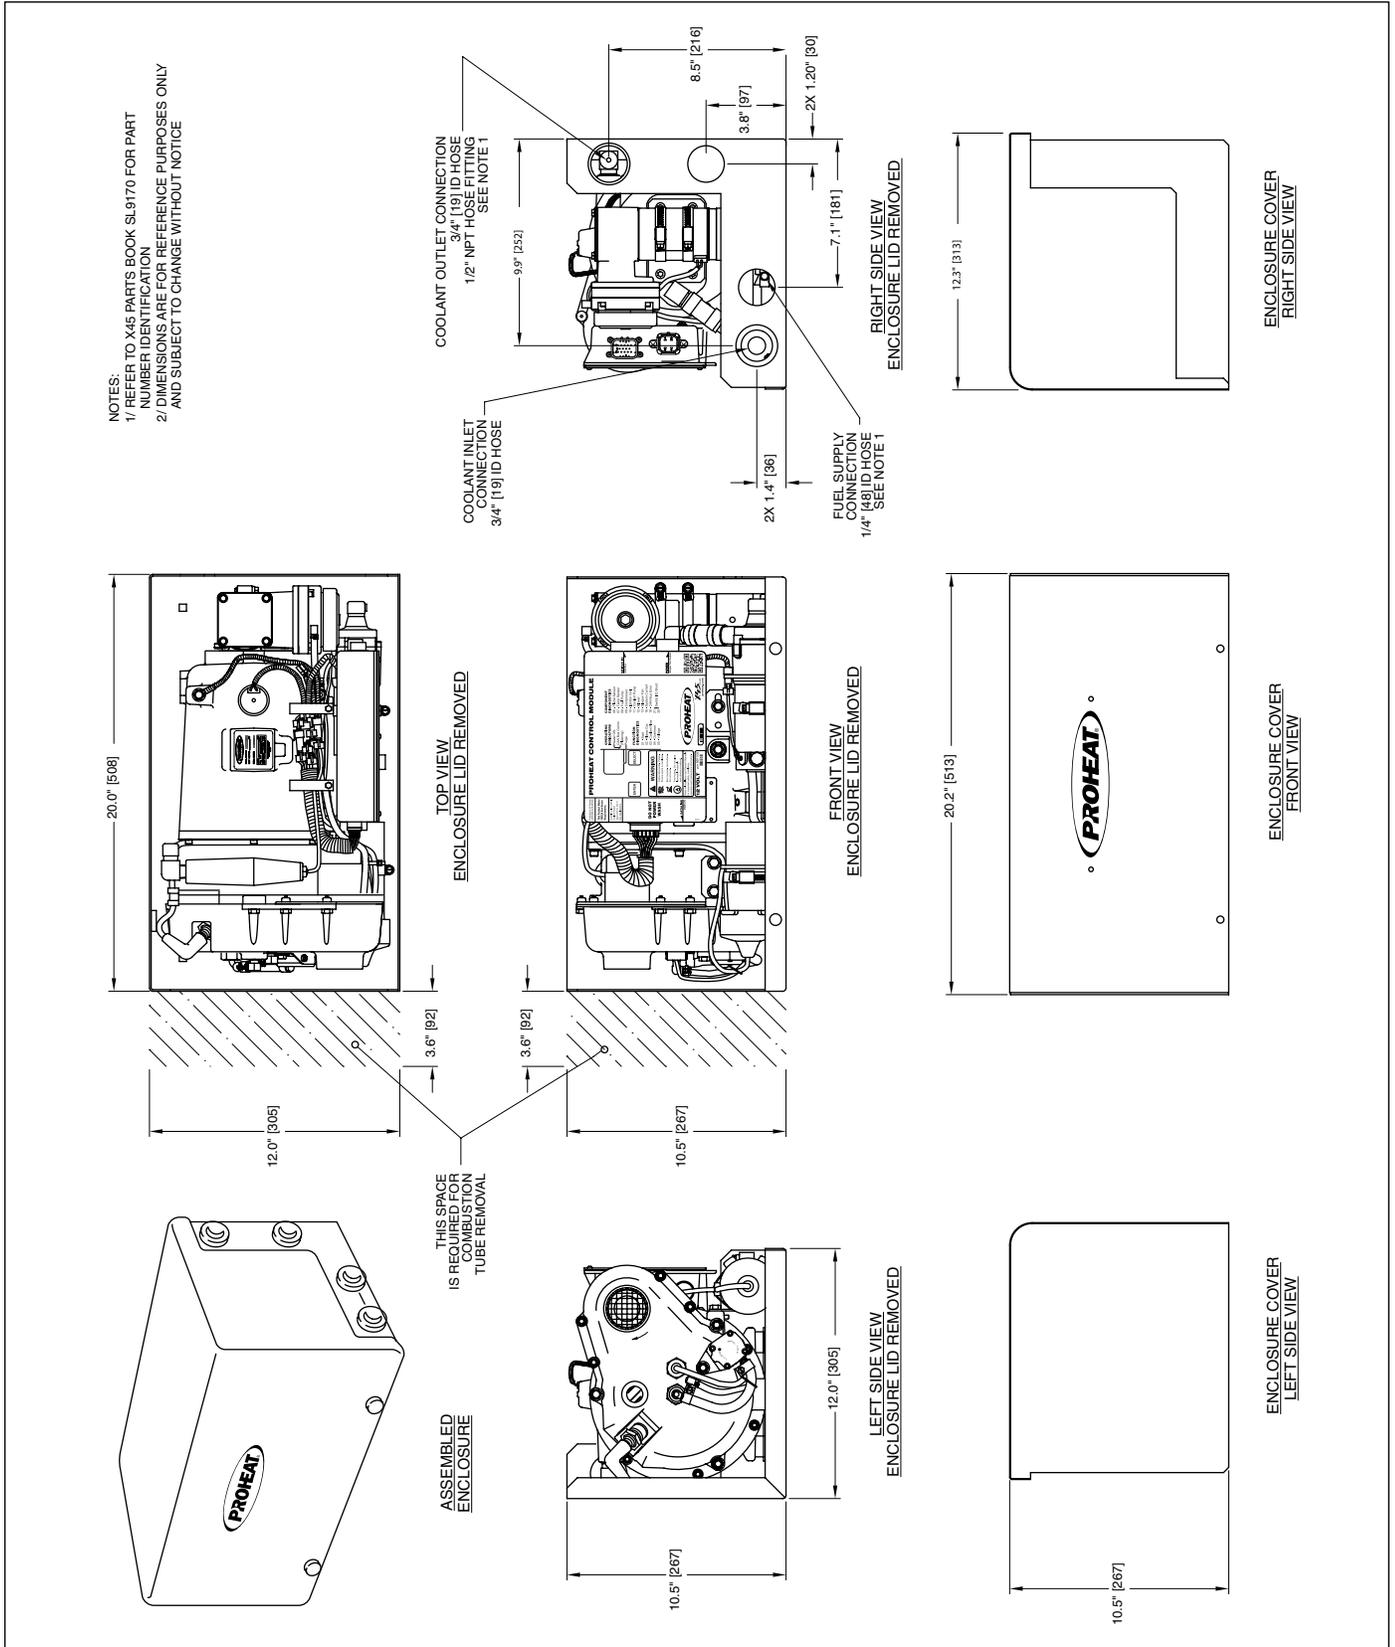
Heater Dimensions including Enclosure – X45 Plus
